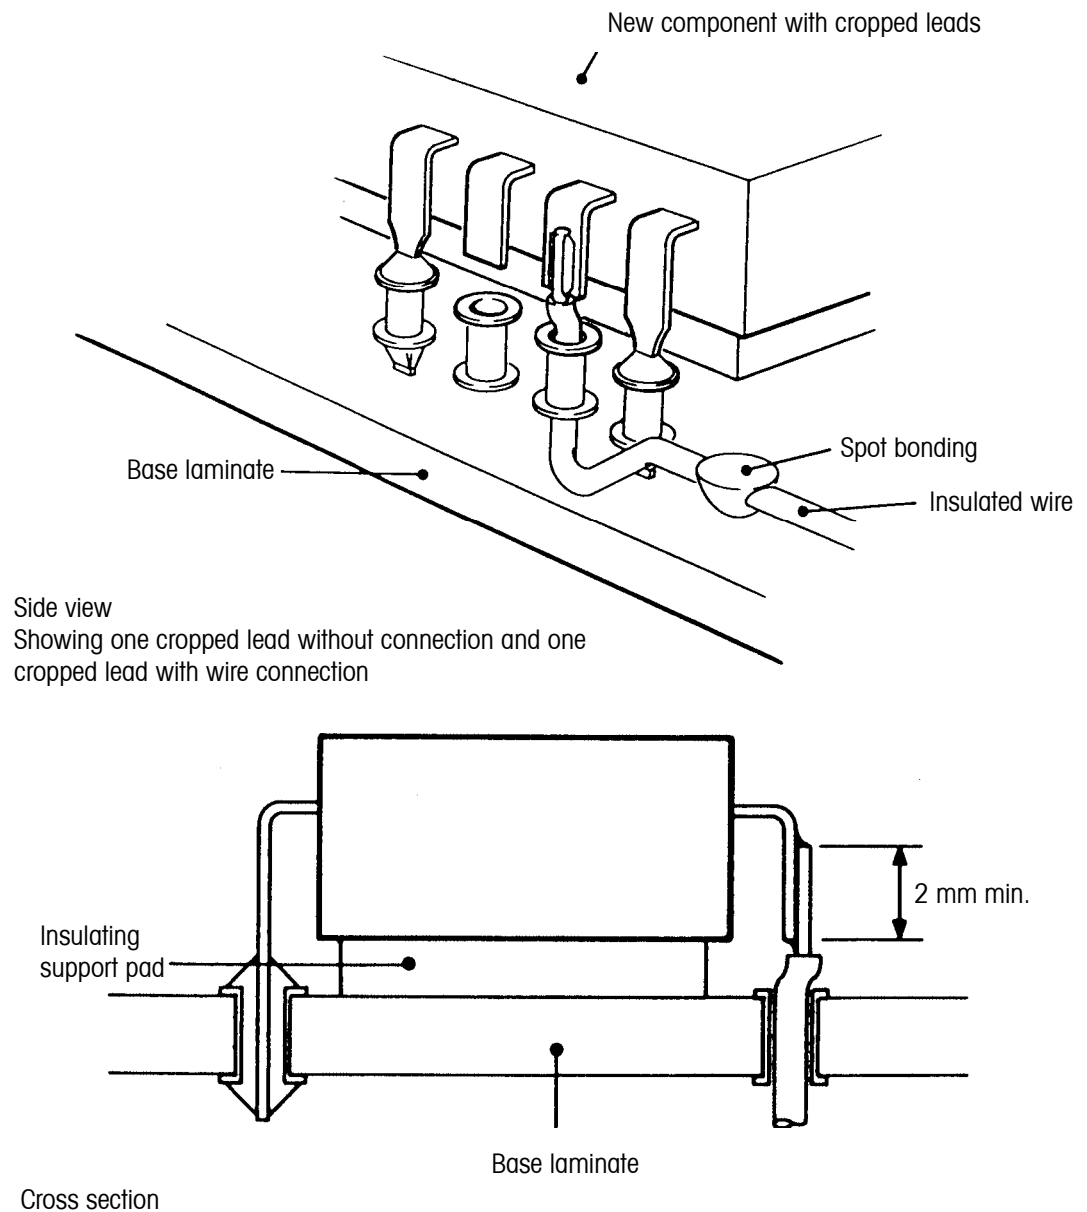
Mounting a dual-in-line package with or without a wire link soldered onto a cropped lead (cropped lead without connection and cropped lead with connection led through hole and onto board)
